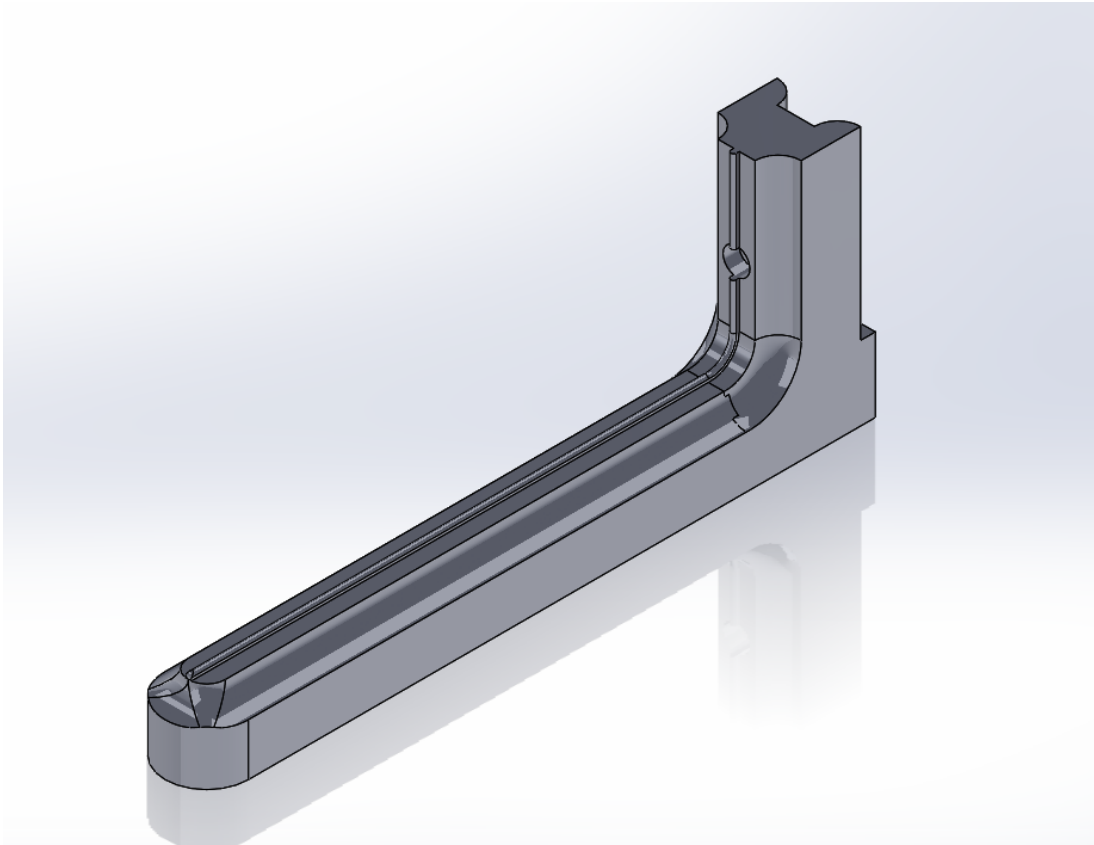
CAD drawing of the Stabilising Foot on SolidWorks
